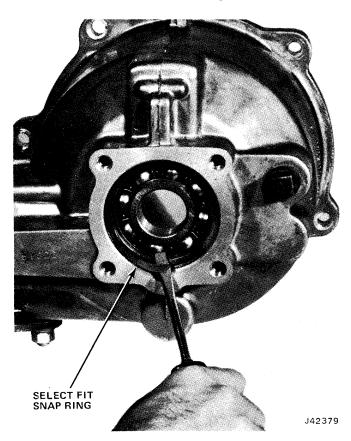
Removing Rear Annular Bearing Snap Ring
